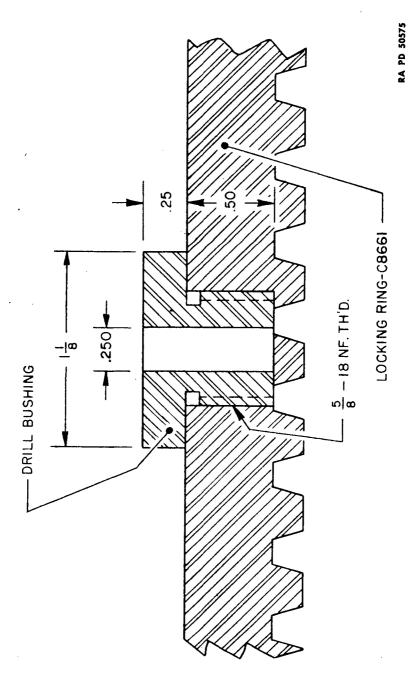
Dimensions of Drill Bushing for Drilling Hole in New Tube for Locking Ring Lock Screw
